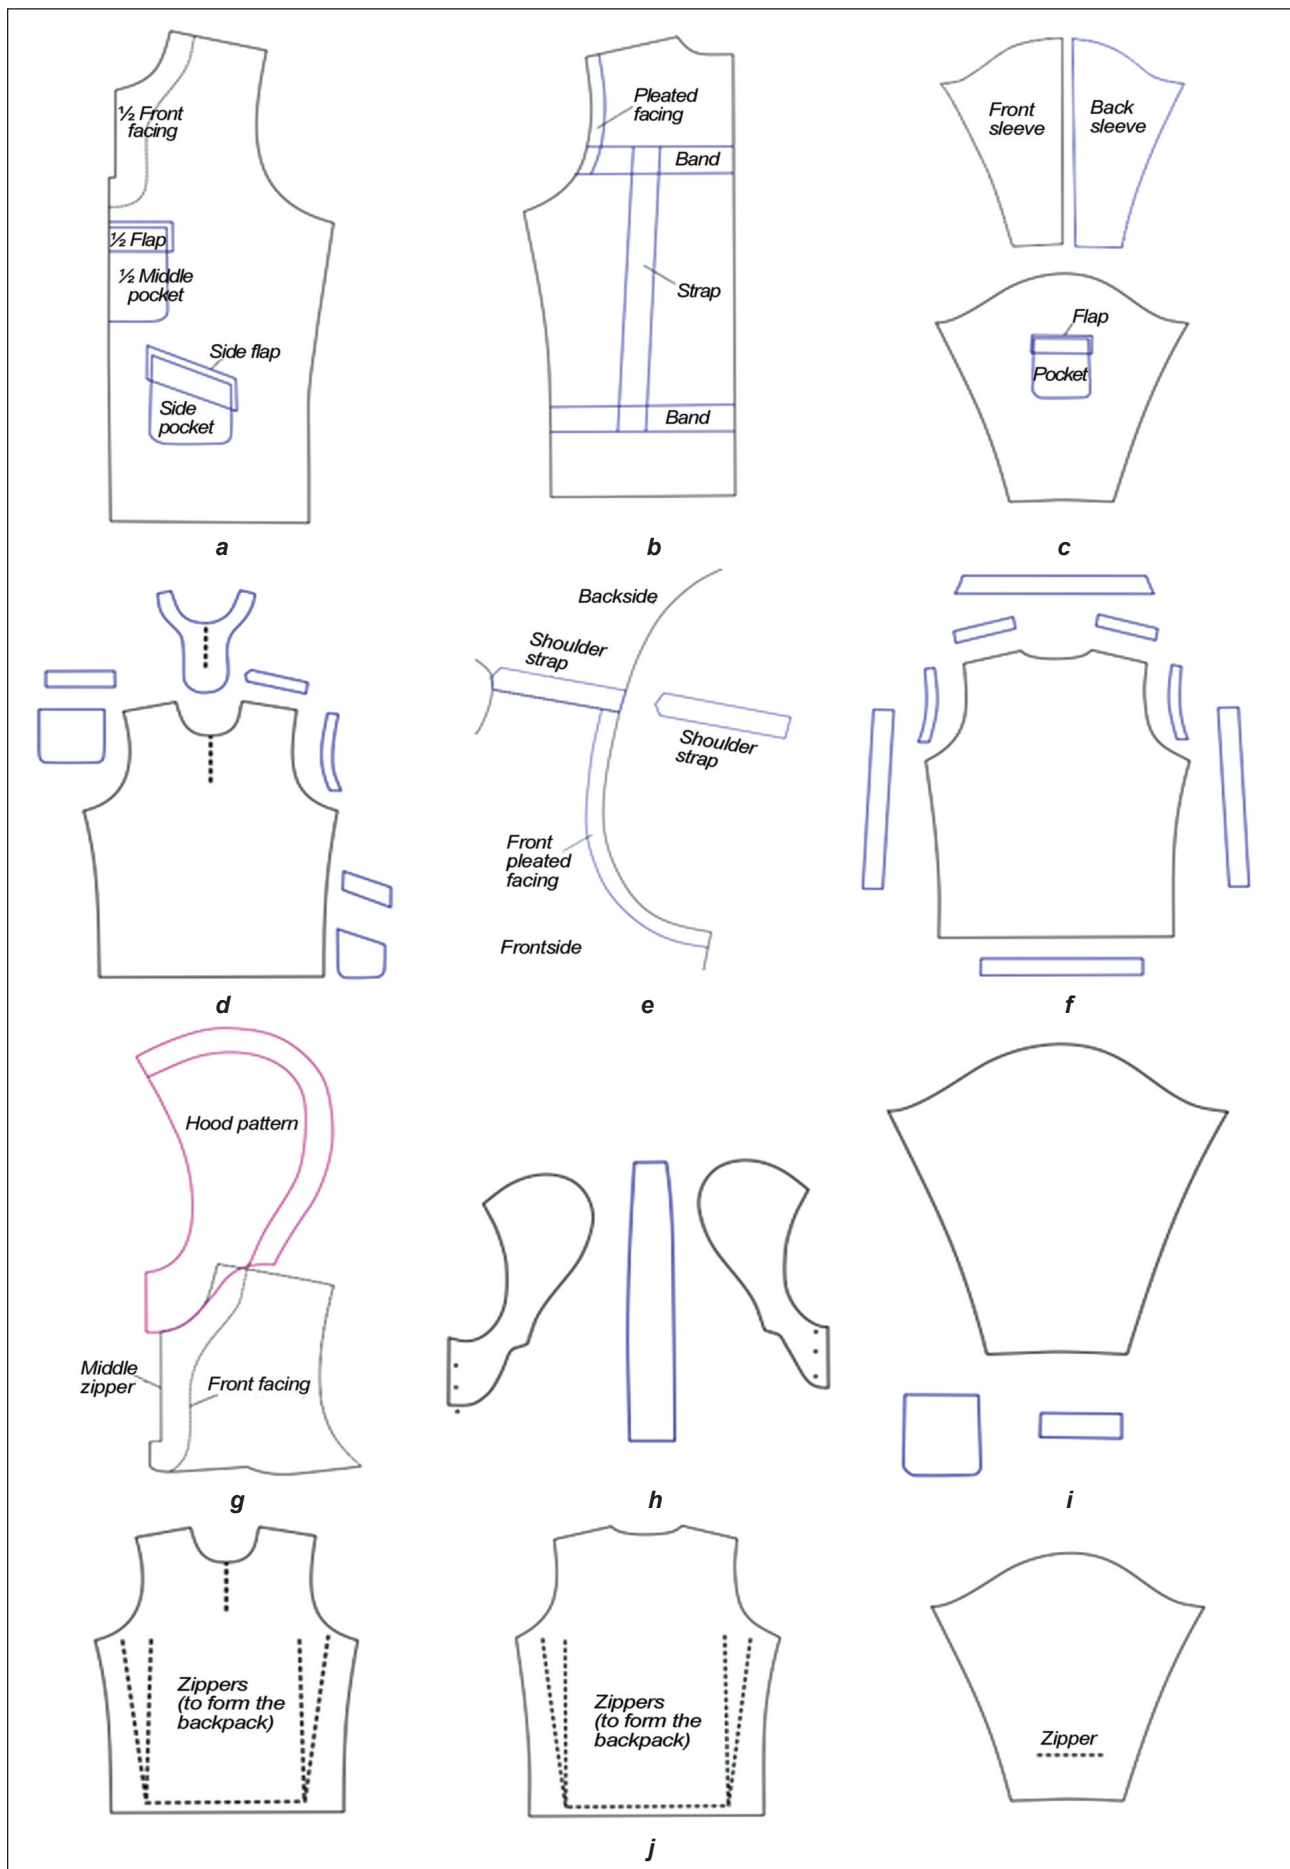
The final 2D shape of the pattern blocks *a* – frontside; *b* – backside; *c* – sleeve; *d* – pieces of the frontside; *e* – designing the shoulder strap; *f* – pieces of the backside; *g* – hood positioning; *h* – pieces of the hood; *i* – pieces of the sleeves; *j* – placement of the zippers
